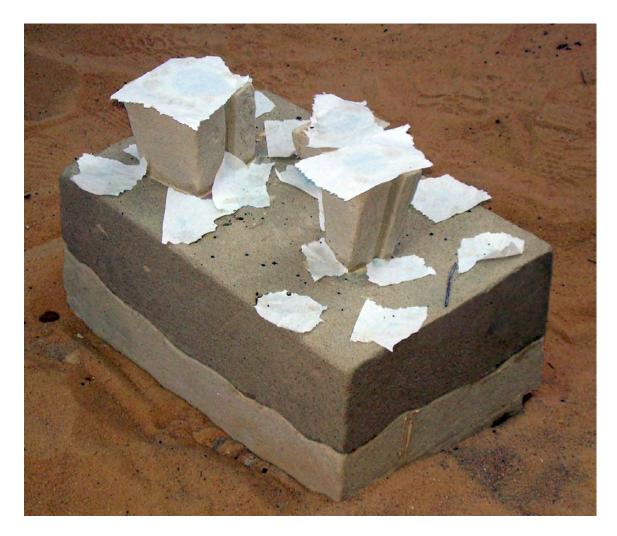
Two piece sand block mold glued together with sand cups. (Note: paper towels are placed on top of the cups to keep debris from entering inside the mold.
